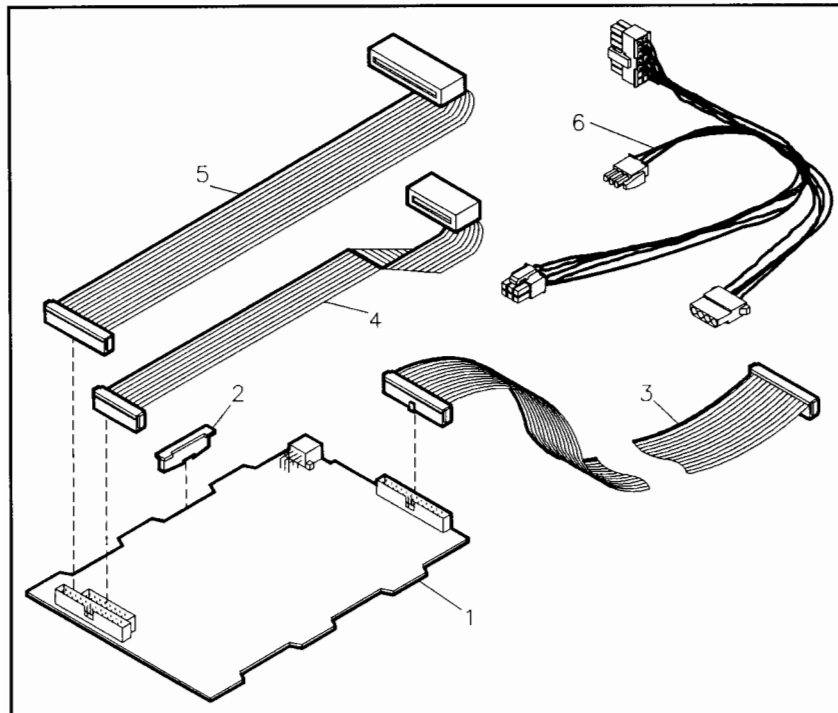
Models 335H and 670H Controller PCA and Cabling, Exploded View
